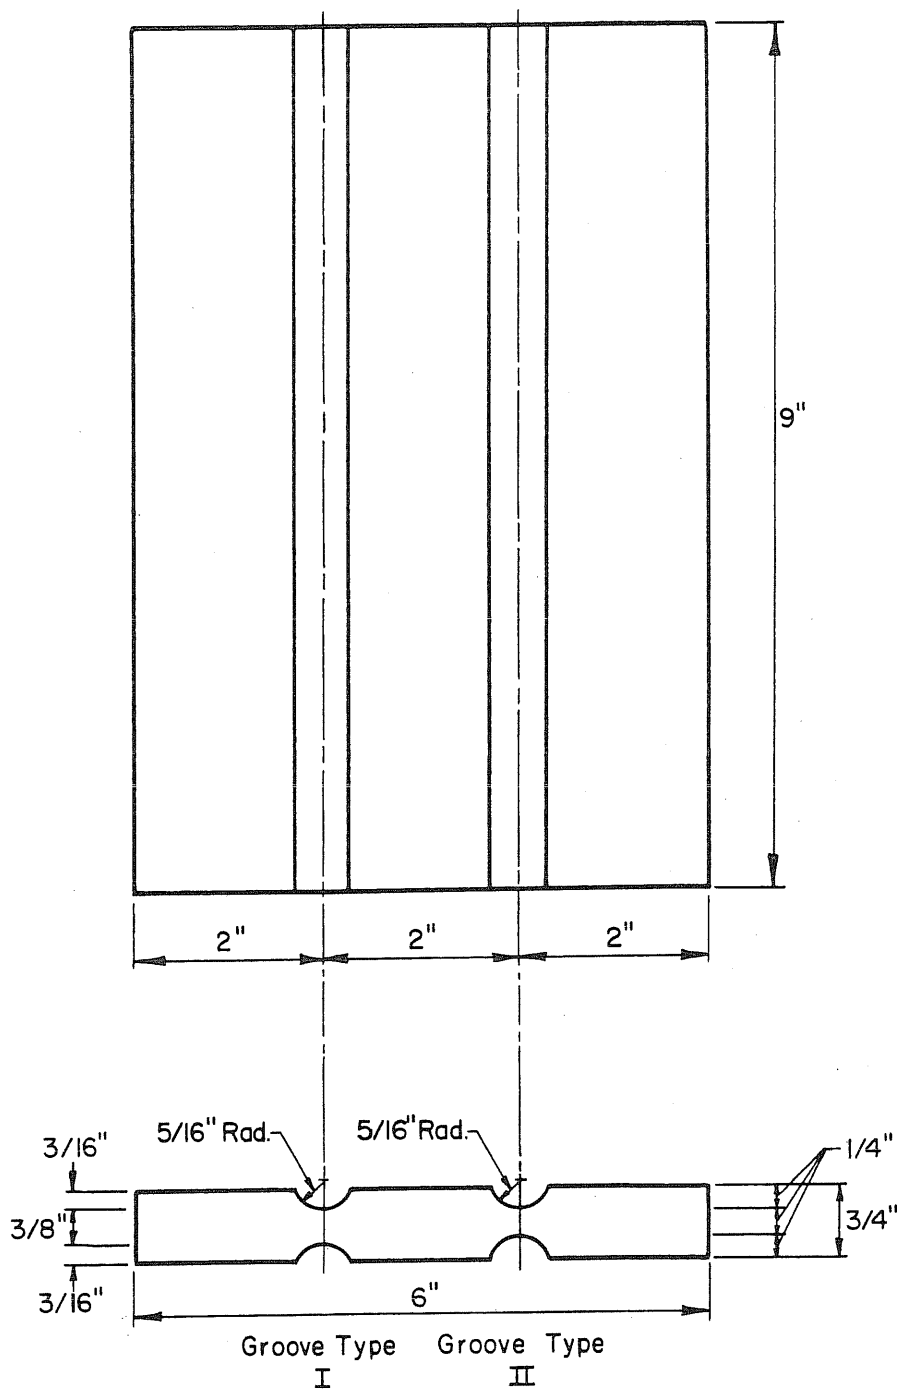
SKETCH OF U-GROOVE SAMPLE WELD PLATES
